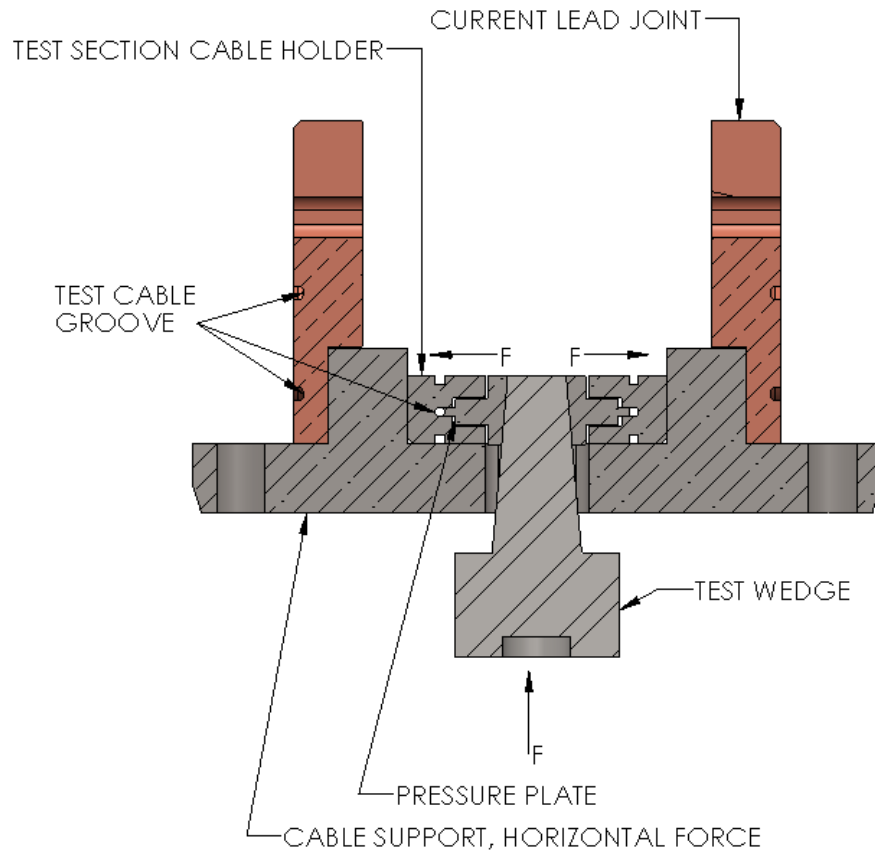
Transverse Load cross section with Test Cable Groove
